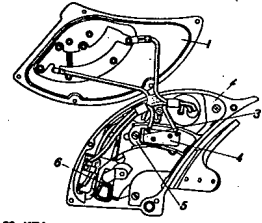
M10-2 Electric Mechanism Drive Box with Cover Open
